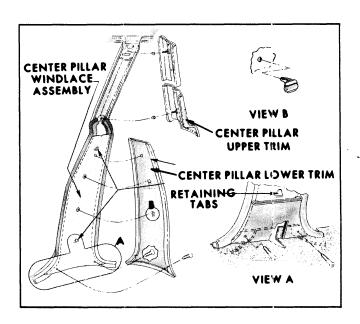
Center Pillar Trim Attachment - Typical Installation
